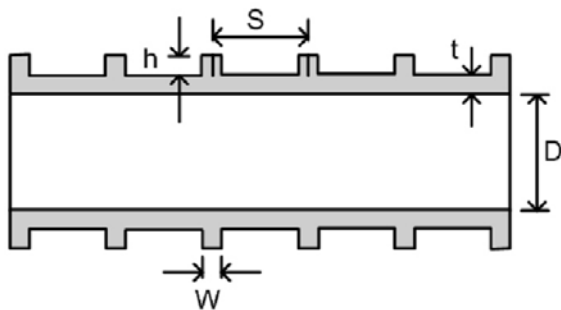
Cross Section and Dimensions of GFRP Pipe with Ribs
